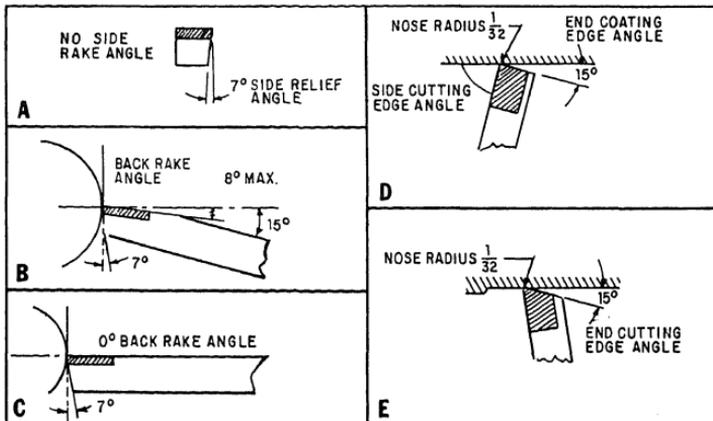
Cutting tool angle for machining a thermal spray metal coating.
